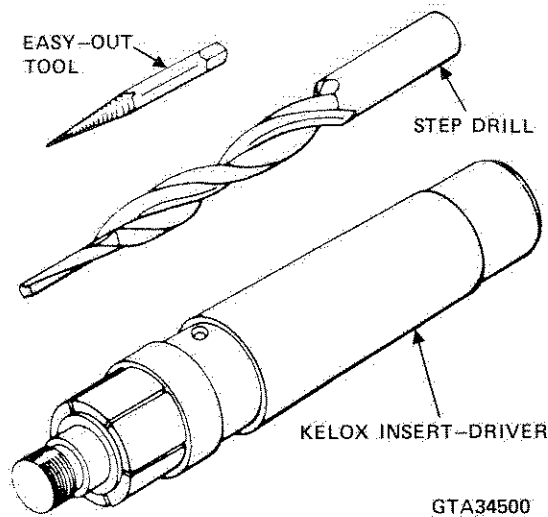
Tools for Installing and Removing Helical (Kelox) Inserts
